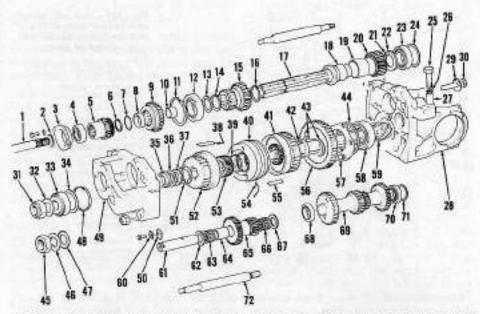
Exploded view of 12 speed synchromesh transmission used on 1190, 1290 and 1390 models.
